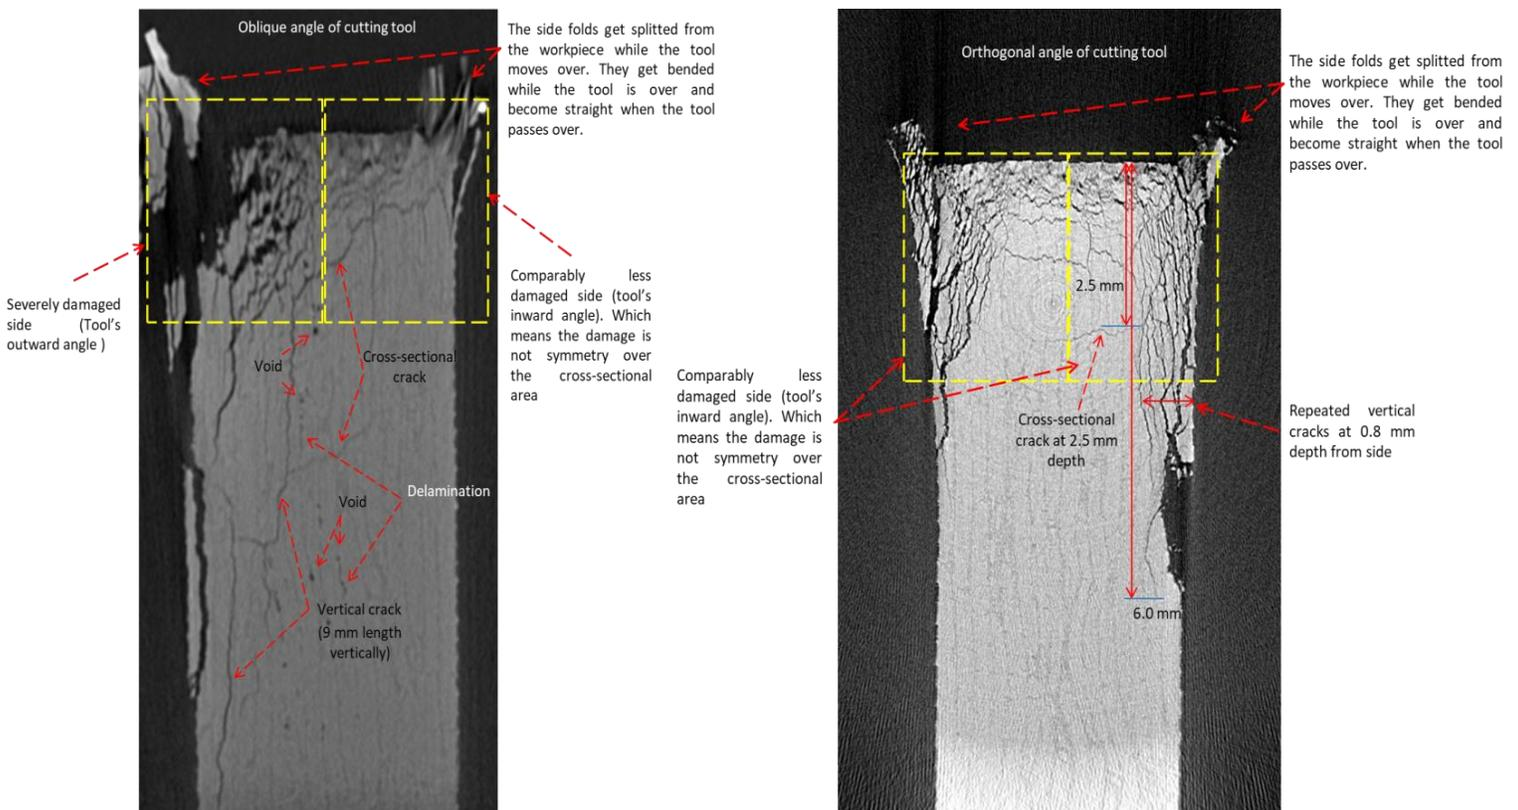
Machining induced defects at 250 μm cutting depth (a) at oblique cutting (135° fiber orientation) and (b) at orthogonal cutting (135° fiber orientation).
